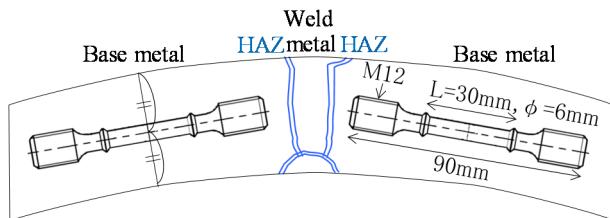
Position of specimen cut from welded joint and size of specimen
